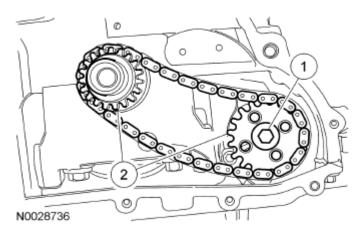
Identifying Bolt And Oil Pump Chain Sprockets Courtesy of FORD MOTOR CO.
